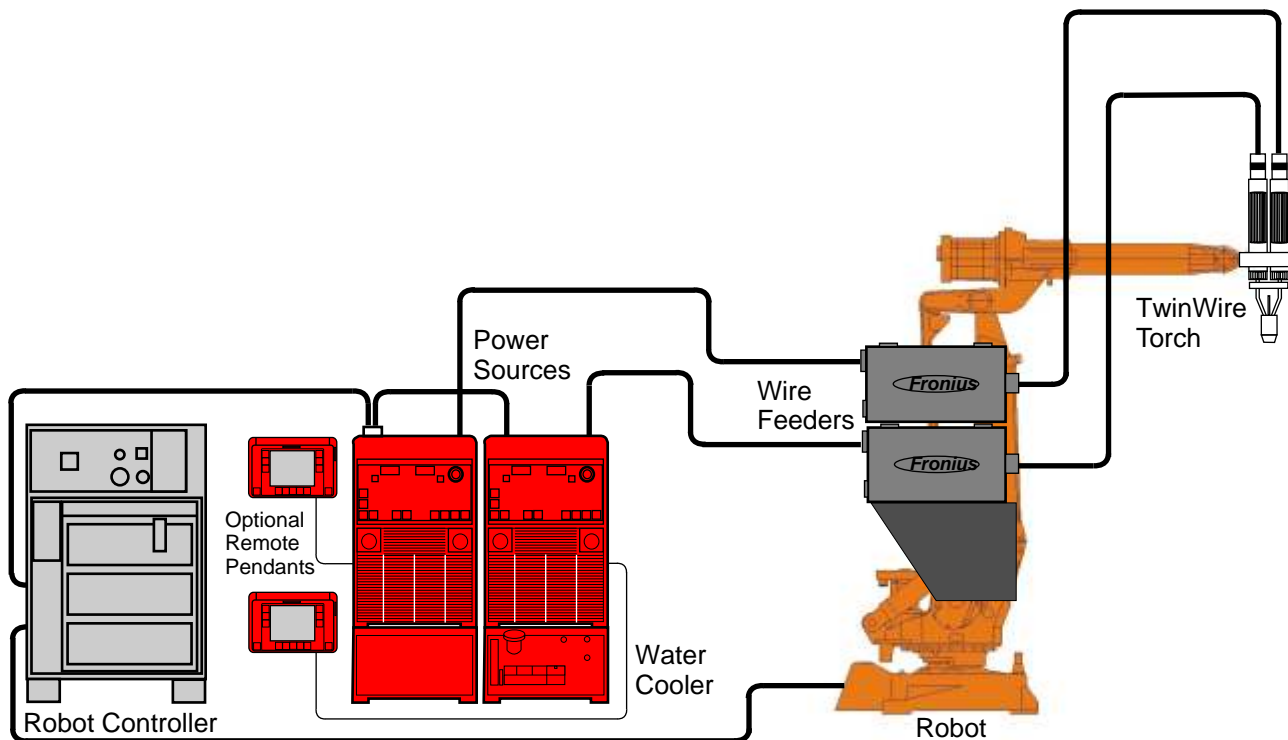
Basic diagram of standard tandem welding components in an automated application.
